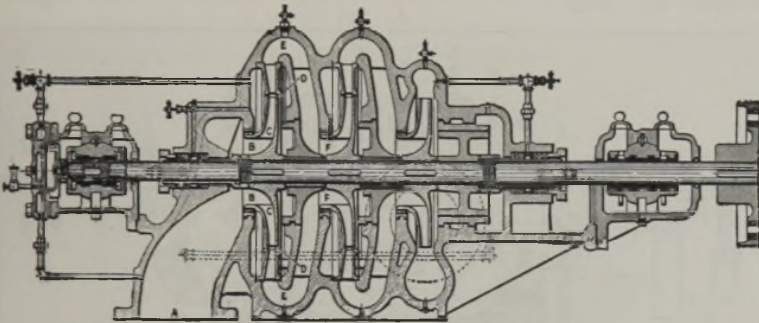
Cross section of Cameron three-stage centrifugal turbine pump.
